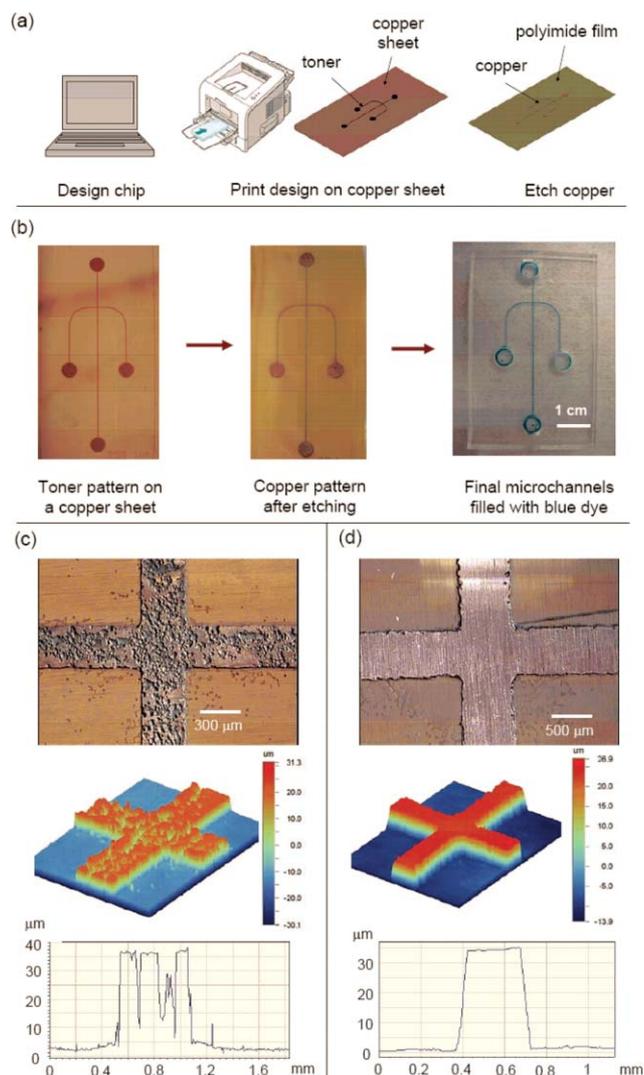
Masters on-demand fabrication method for forming microfluidic devices. a. Schematic depicting the formation of copper-on-polyimide masters. First, a channel design is drawn using CAD software; then the design is printed on a flexible PCB substrate; finally, the exposed copper is etched away and the remaining toner removed. b. Pictures of the actual fabrication process showing the toner pattern on the copper sheet, the copper pattern after etching, and the resulting channel bonded to a glass slide and filled with a blue dye. c./d. Pictures and 2D and 3D profilometer scans of the resulting masters. c. A single layer of toner cannot fully protect a $35\ \mu\text{m}$ -thick copper feature during etching, and surface pitting is observed. d. When a registration black toner mask is used, the toner is dense enough to resist dissolution in etchant. Masks formed from registration black can provide protection for sufficient time to etch up to $70\ \mu\text{m}$ -thick copper with no pitting. Note the slightly trapezoidal nature of the sidewalls.
